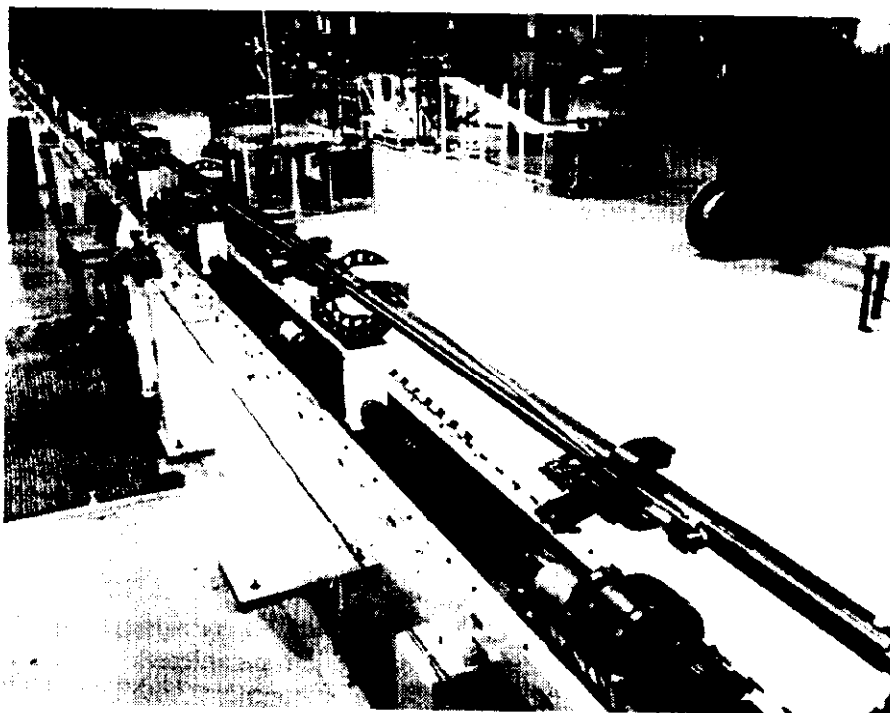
BNL shuttle-type winding machine for 4-cm aperture, 17-m-long collider dipole coils.
